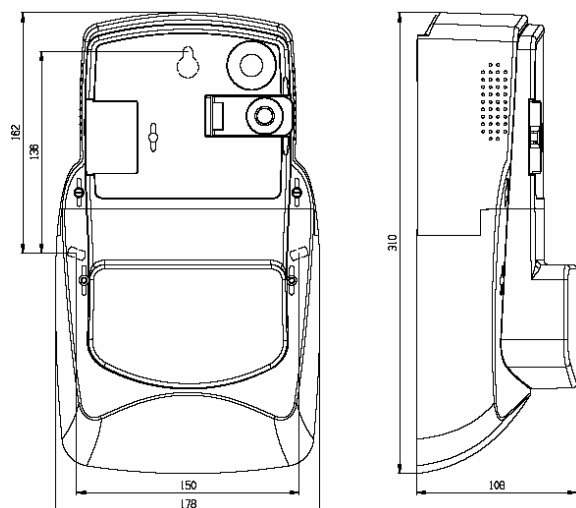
Fixing dimensions of meters with a mounted breaking module
